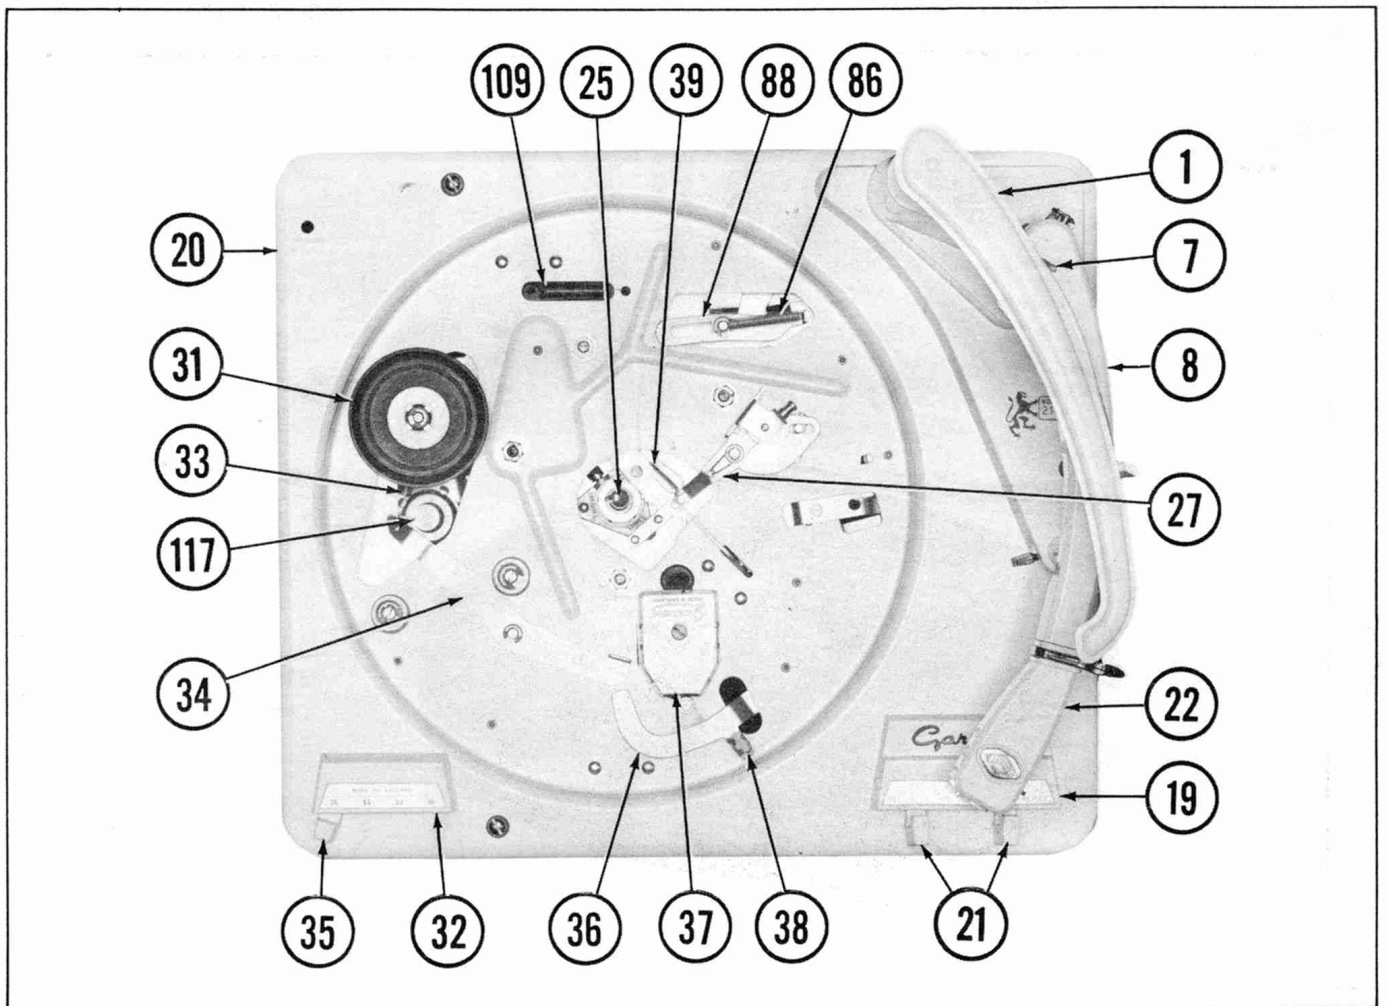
TOP VIEW OF MECHANISM WITH TURNTABLE REMOVED
